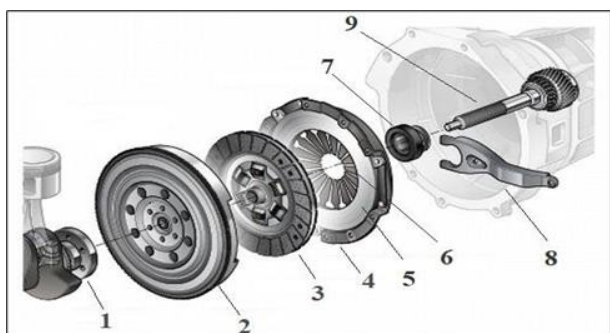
Dry friction single disc clutch. (1 - crankshaft; 2 - flywheel; 3 - friction disc; 4 - presser; 5 - mirror disc; 6 - diaphragm spring; 7 - axial bearing; 8 - shoulder fork; 9 - primary shaft)
